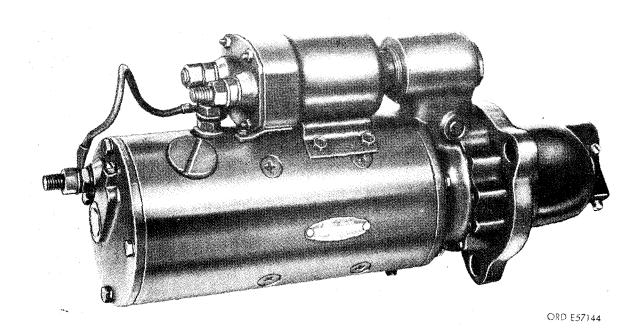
STARTER ASSEMBLY - 2920-226-6545 - ASSEMBLED VIEW.
